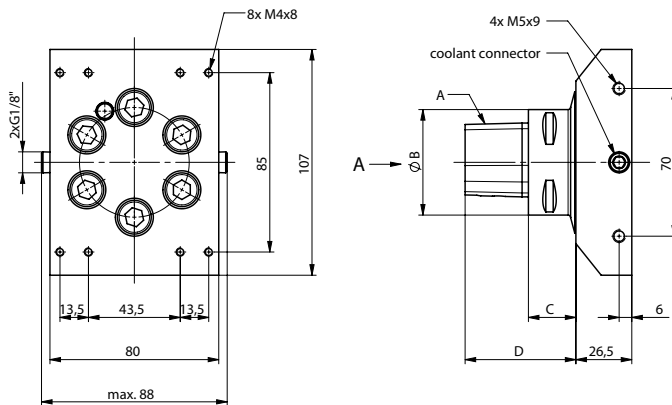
Machine adapter with Capto C... for disk-type turret with Coromant-Capto clamping unit, Type 9119AC...S
